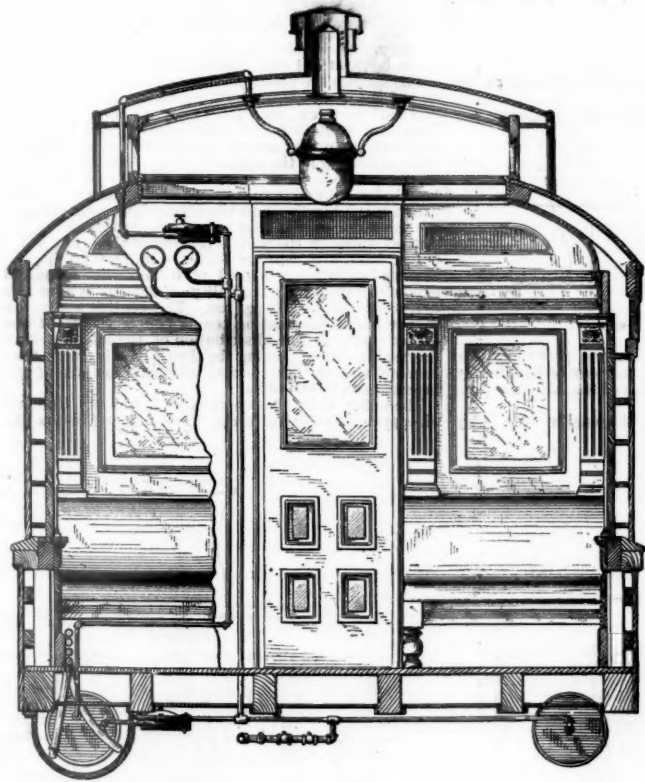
Arrangement of Carburetter and Connected Parts. Scale, $\frac{3}{4}$ in. = 1 ft.
